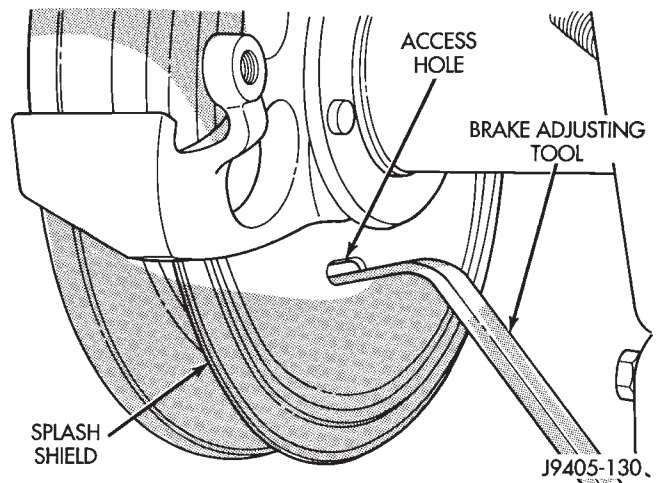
Retracting Parking Brake Shoes (With Rear Disc Brakes)
